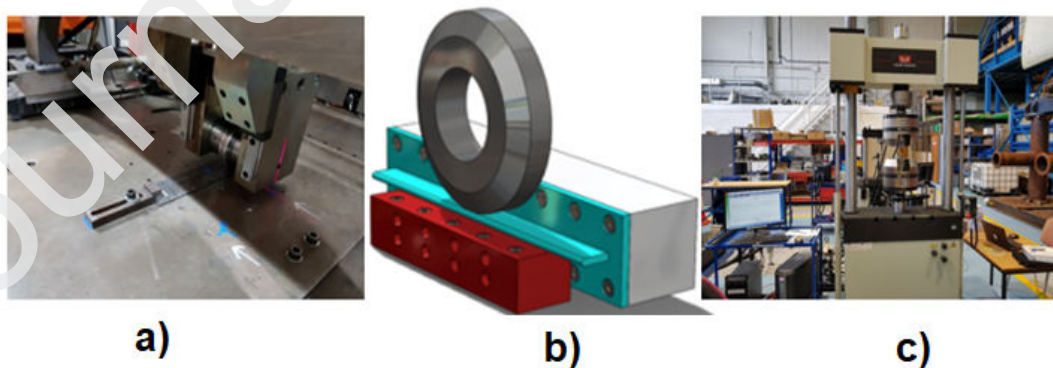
(a) Set-up (b) roller configuration (c) fatigue testing rig
